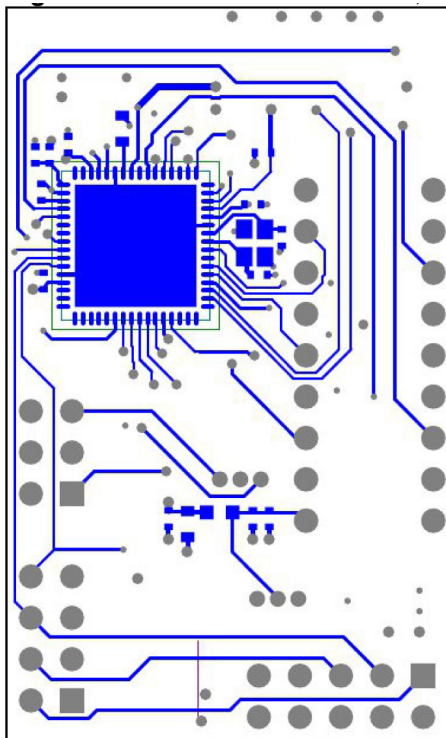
Atmel ATA664151 Board Component Placement; Top side, Top View
